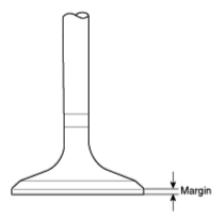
Checking Valve Head Margin Thickness Courtesy of HYUNDAI MOTOR CO.
